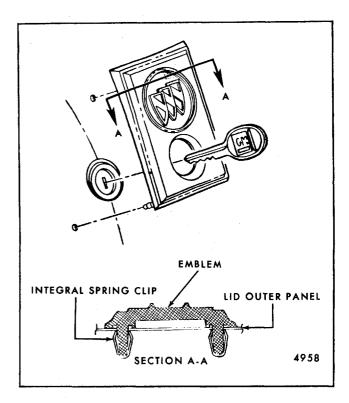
Typical Fixed Emblem - Integral Clip Retained
